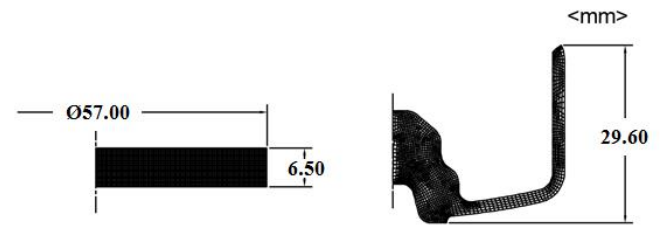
Schematic drawing of tool shape for the forming process of H/Lower
